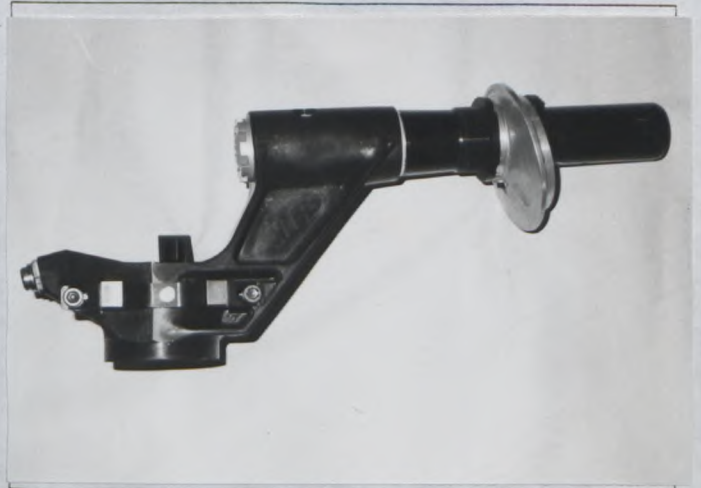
REINFORCED TOPMOUNT TYPE A
